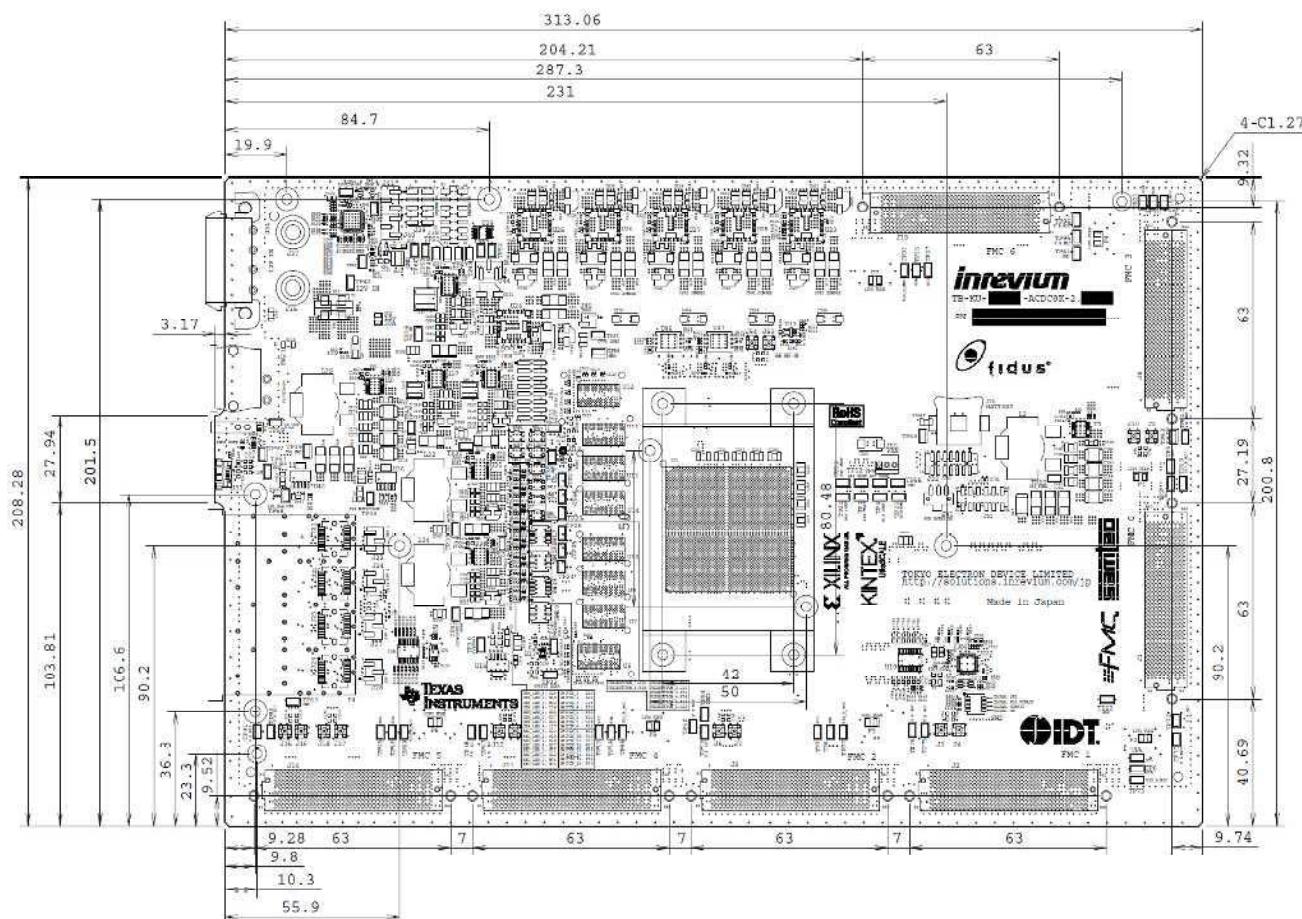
Board Dimensions (inclusive of wastable substrate, top view)
